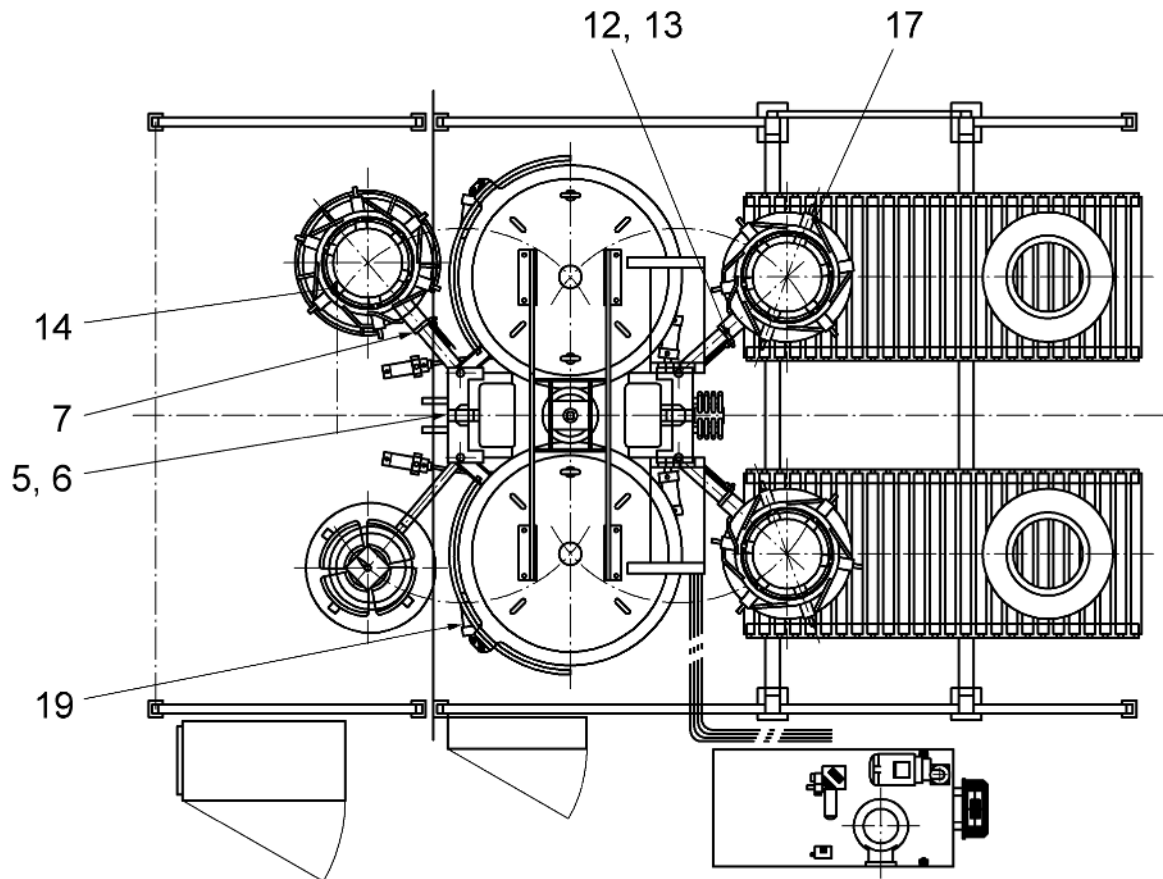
Location of hazards on crossing flow tyre curing machines (top view)
